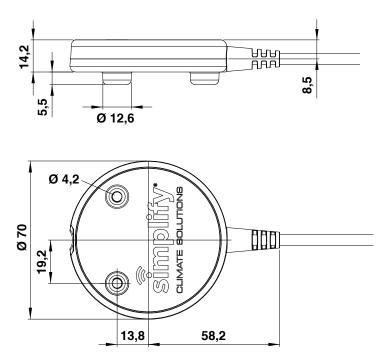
Dimensions Simplify Sensor Probe - Resistive (in mm)
